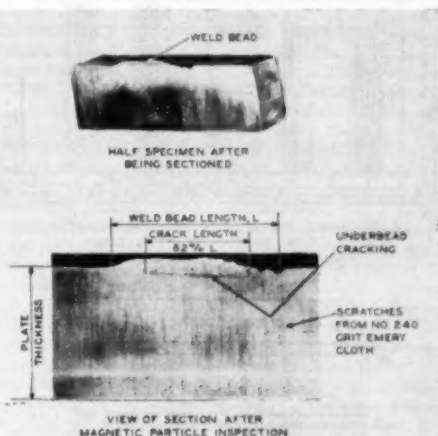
TYPICAL UNDERBEAD CRACKING SPECIMEN OF 1-IN. QUENCHED-AND-TEMPERED T-1 STEEL WELDED WITH E6010 ELECTRODE
